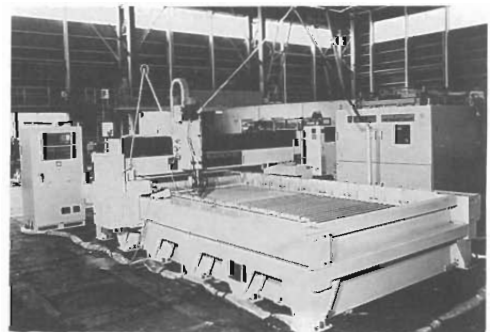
View of a two-axis NC standard cutting machine "KAWACS" (Table size 1,550 × 3,100mm)
